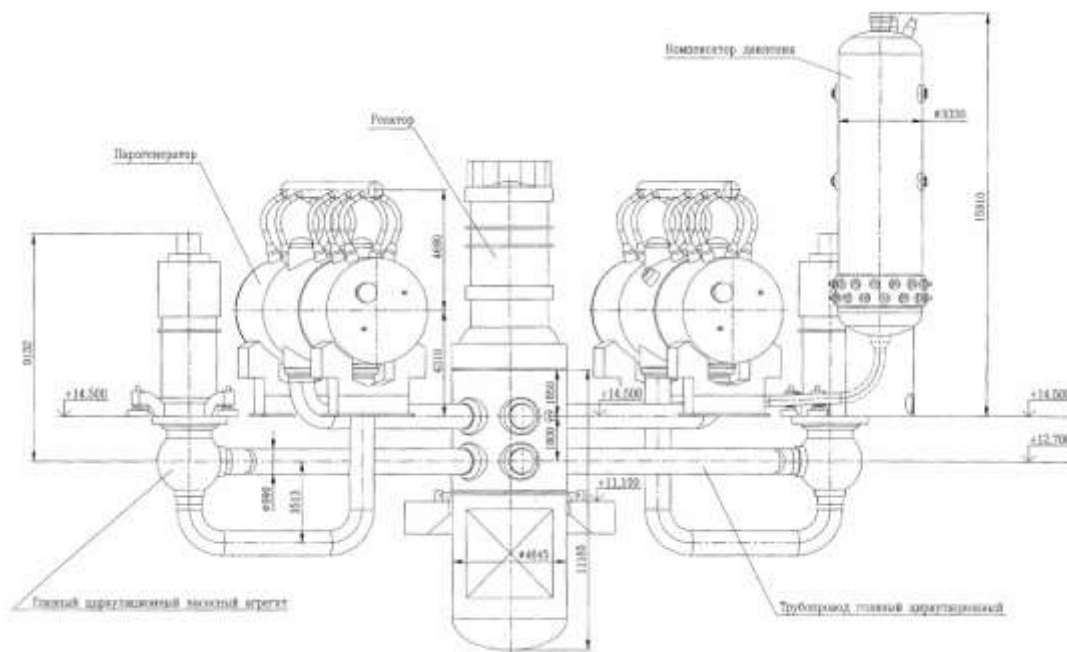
Layout of the Reactor Plant equipment with elevations
